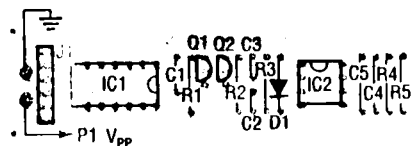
EPROM PC BOARD. Mount all parts except J1 on the component side of the board; mount J1 on the foil side.
